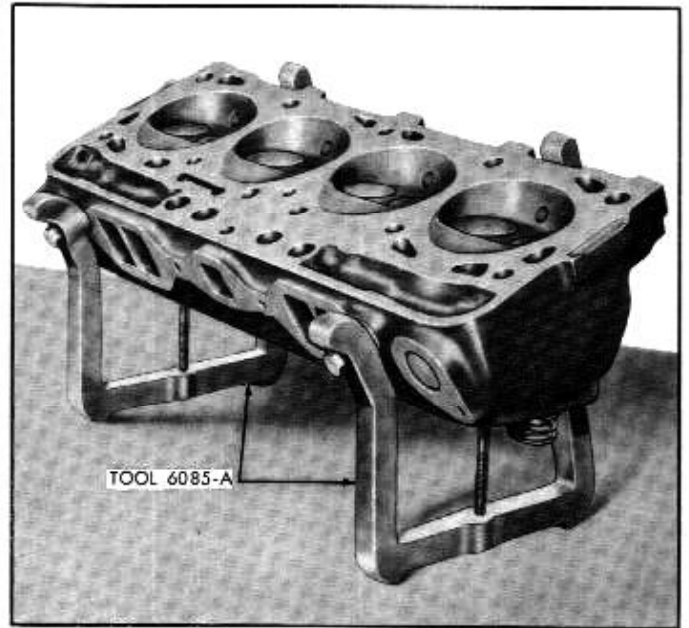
C-108—Cylinder Head Positioned for Carbon Removal
